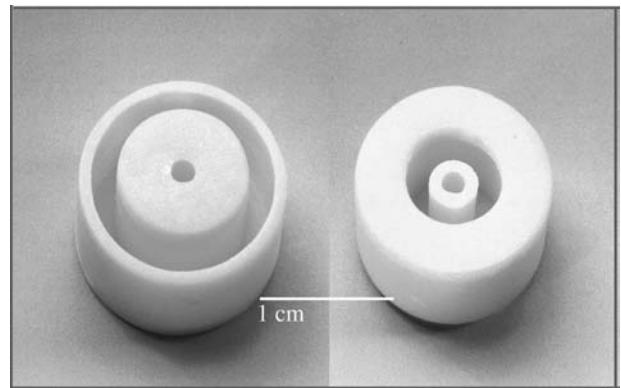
Photograph showing the top and bottom faces of a telescoping actuator structure.
